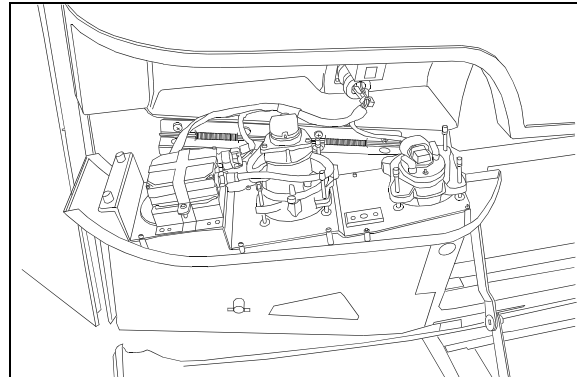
OPENING HEADLIGHT ASSEMBLY 06547
